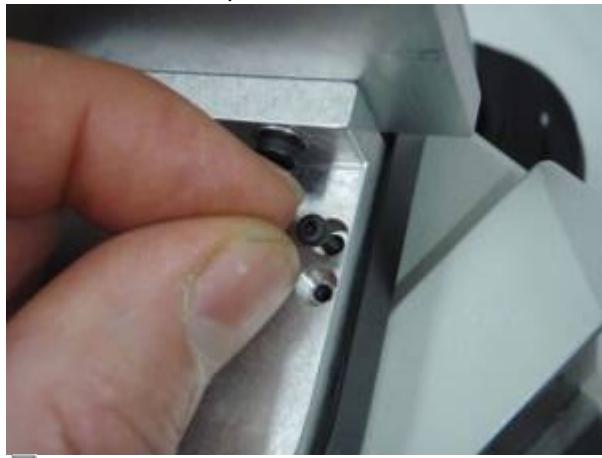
Use the two 2 x 8 mm socket head cap screws sent with the drive assembly & the 1.5 mm Allen wrench to secure the drive assembly to the focus assembly as shown.
